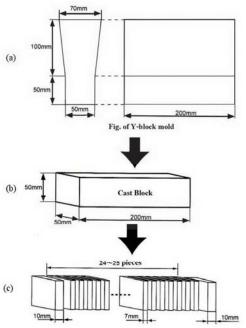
Schematic drawing of process to make test pieces. a) shape of casting, b) substantial part and c) test pieces.
